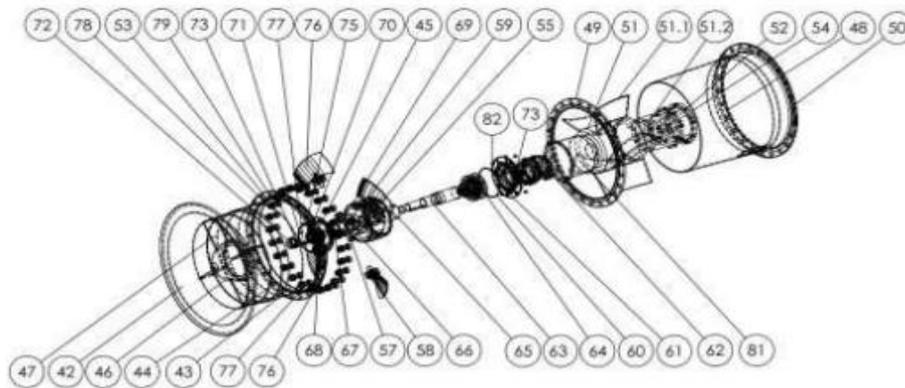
Technical Drawings of Hydraulic Driven Axial Pump 2000 LPS
